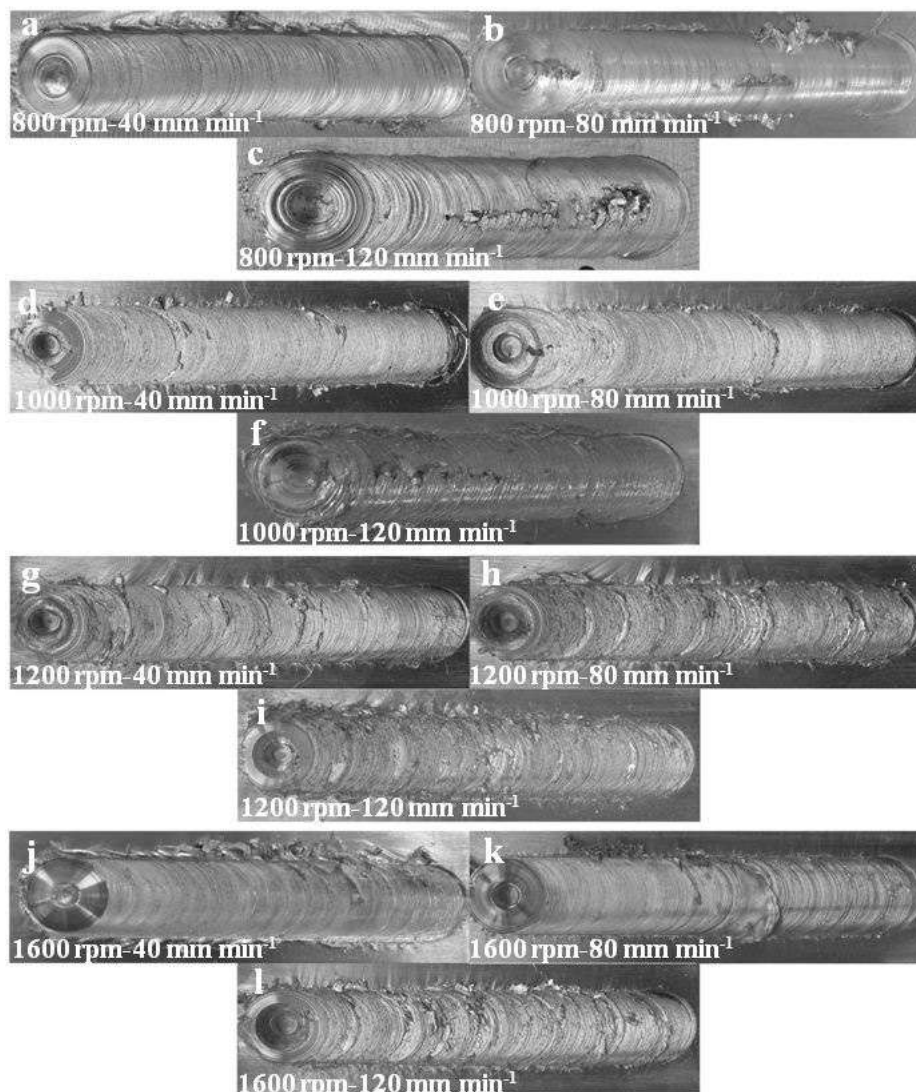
Surface images of lap joints of Mg and Al using various welding conditions (a-l)
